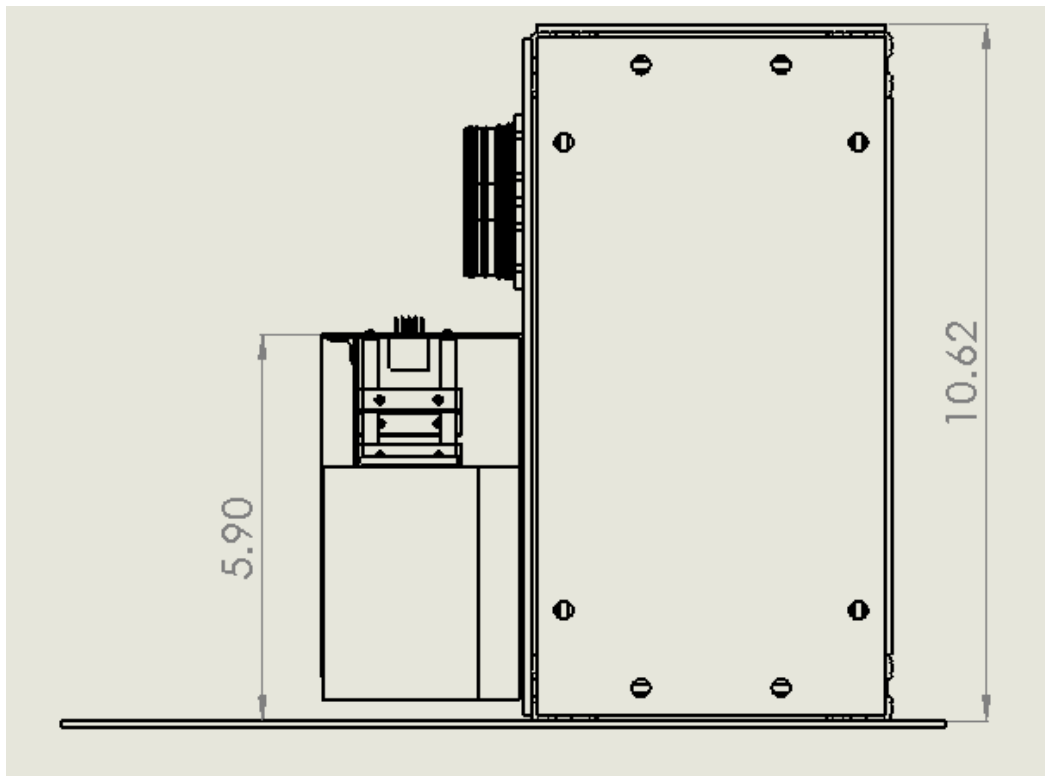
Side View of Payload on HASP Mechanical Interface Plate (units shown are in inches)
